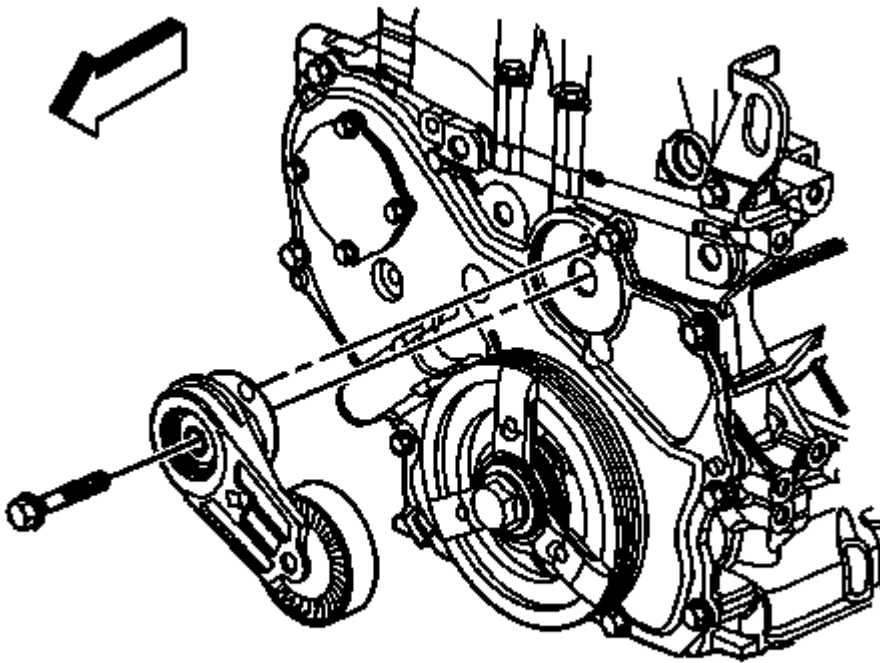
View Of Drive Belt Tensioner And Special Tool
